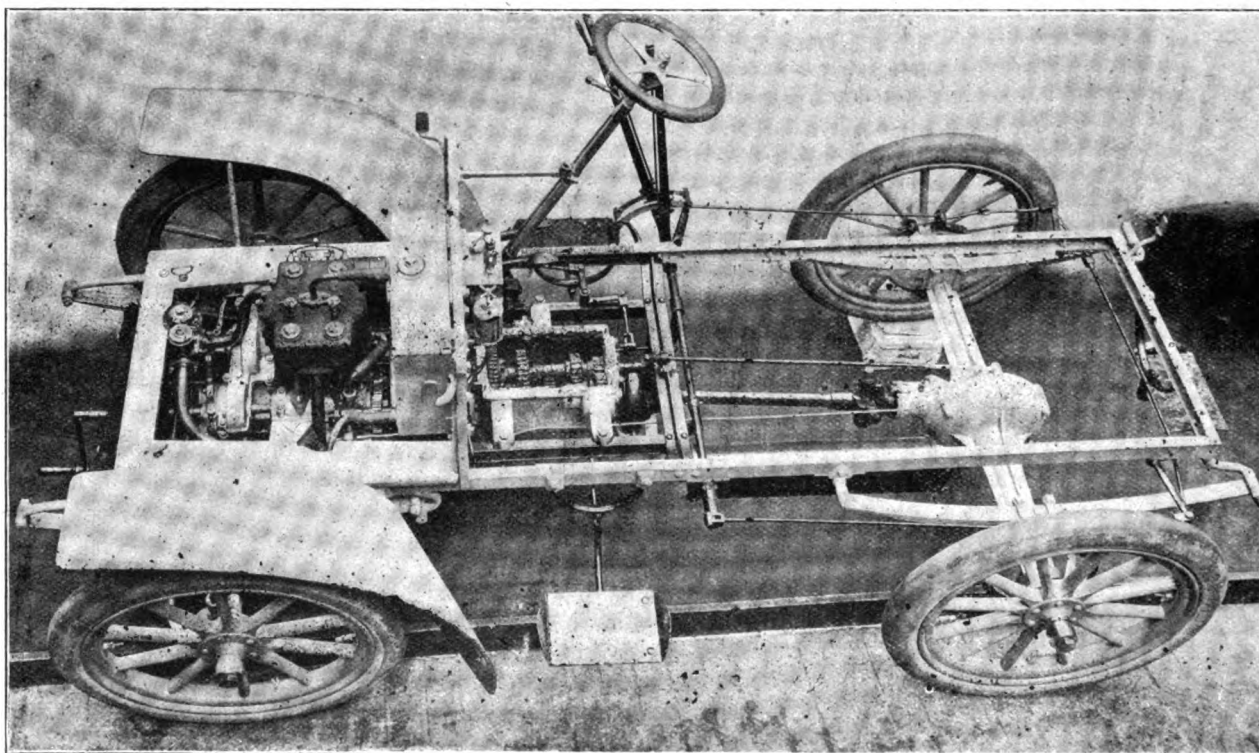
Chassis of Beaufort 10-h.p. Car.
